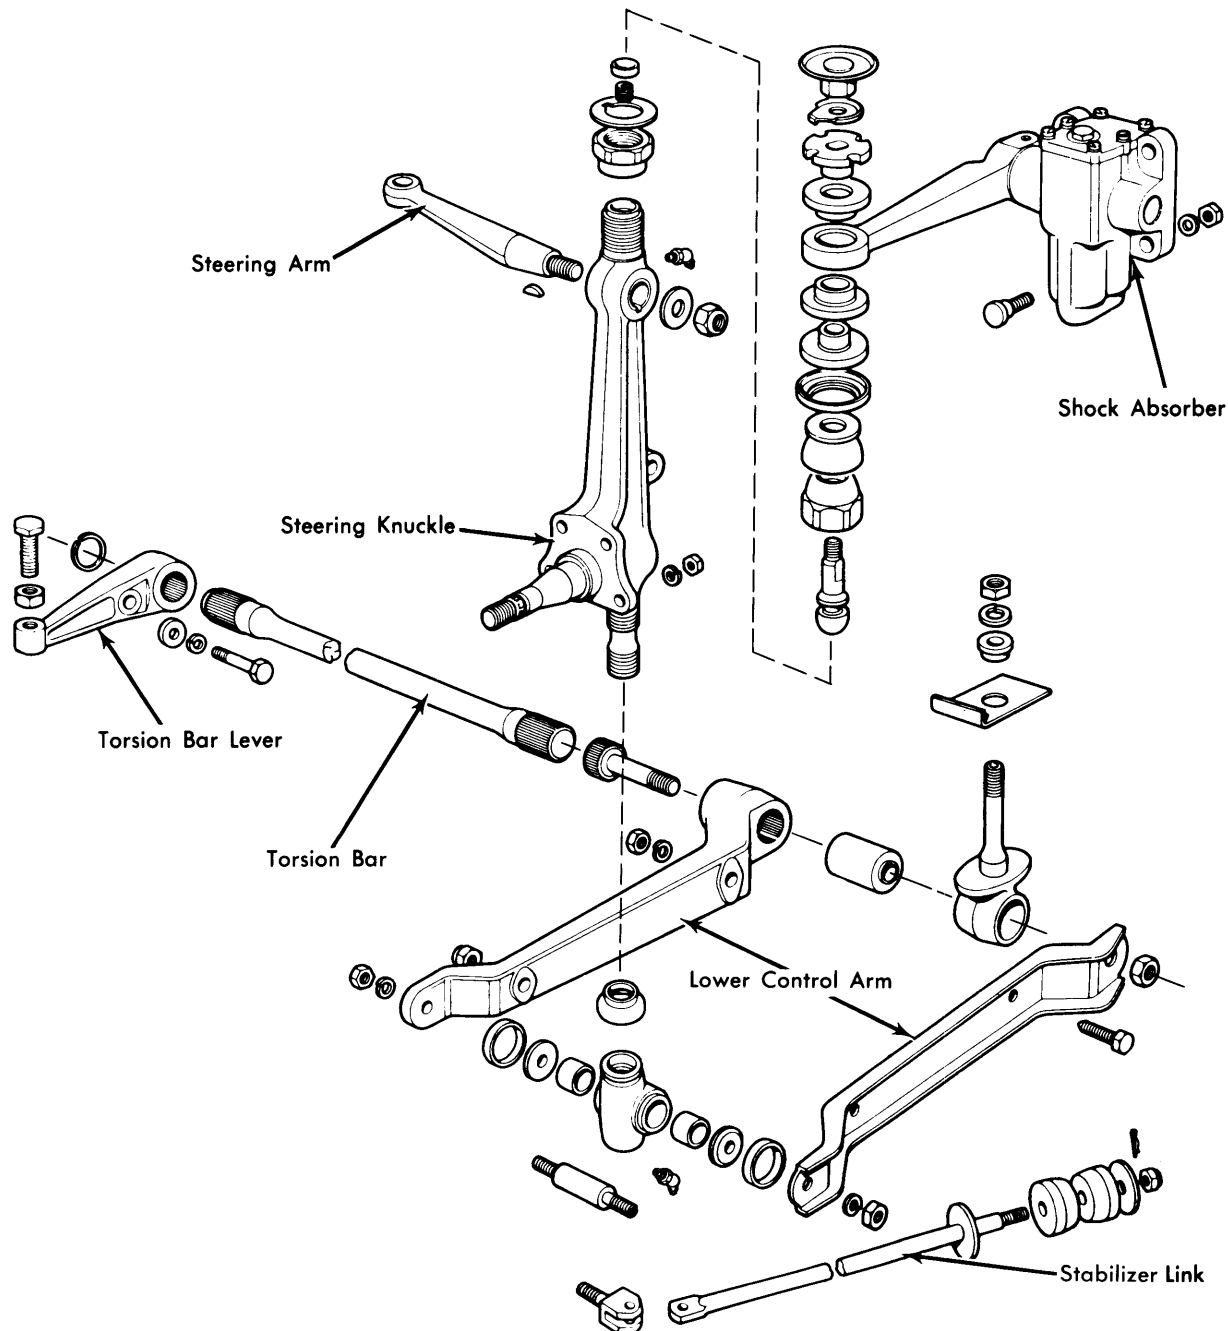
Exploded View of Austin Marina Front Suspension Assembly
